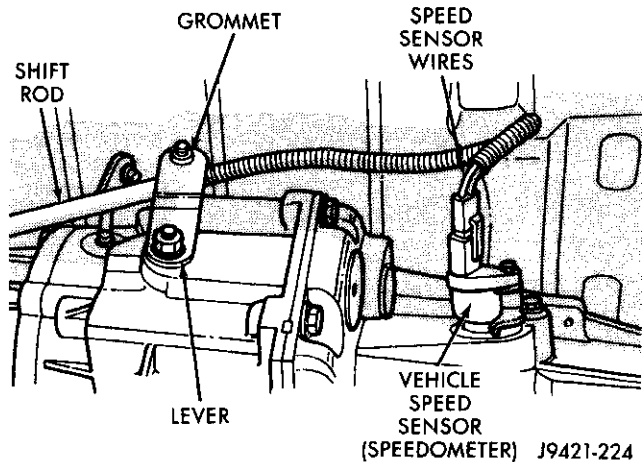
Shift Rod And Speed Sensor Wire Attachment
